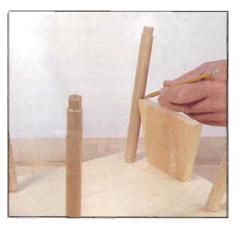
Photo D: To lay out the rung holes, use a scrap block with sides mitered at 10°.
